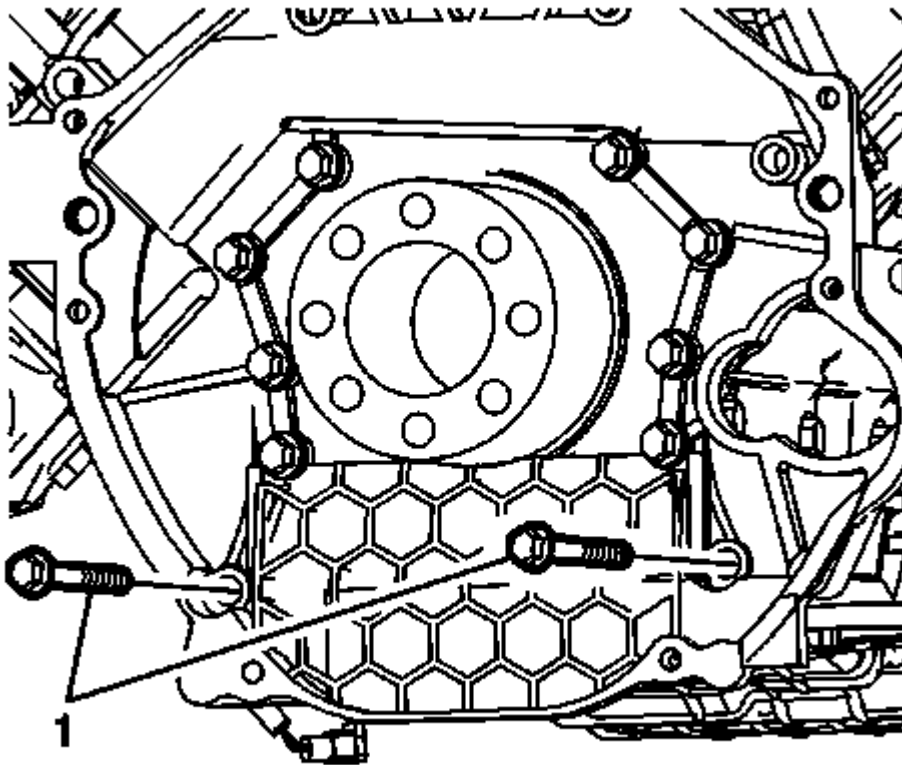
View Of Flywheel Housing To Upper Oil Pan Bolts
